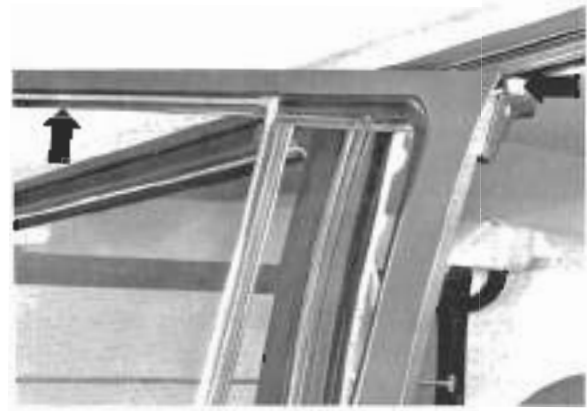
Top part of sliding door being unhooked from the door as indicated by the left arrow. Then slide the roller and guide out of the top runner.
